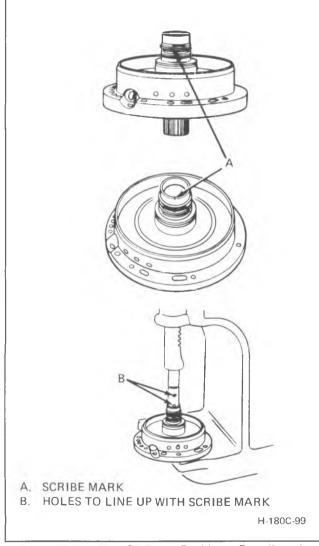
Installing Oil Pump Bushing – Rear (Inner)
